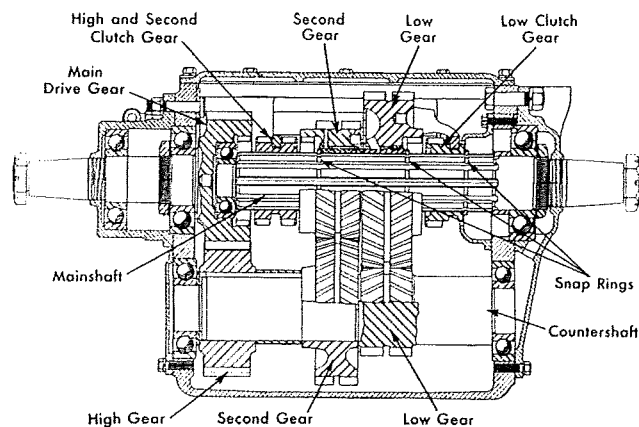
Group No. 49 Fuller 3AY Auxiliary Transmission
